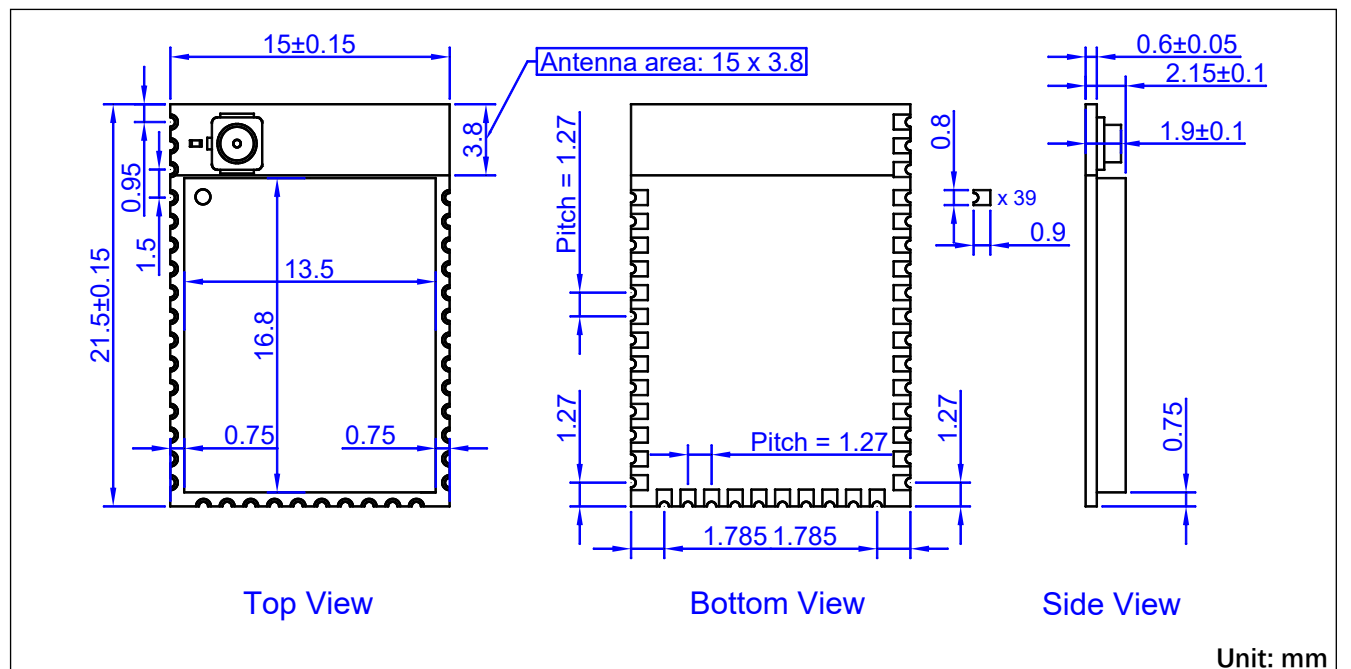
Mechanical Drawing of BDE-MP26R_U and BDE-MP26R_N
